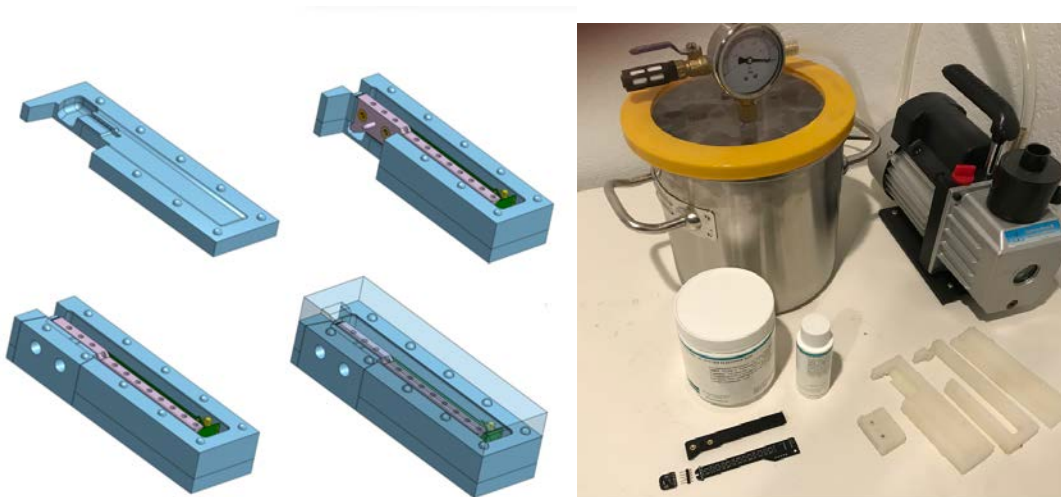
A multi-part mold holds the structural material (3D printed ABS) and the printed circuit boards during overmolding (left). Equipment and materials used during the process (right). (Correll, ICCM, 2017)
